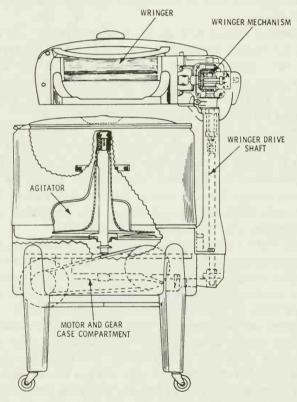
The principal assemblies of a wringer-equipped washing machine.
